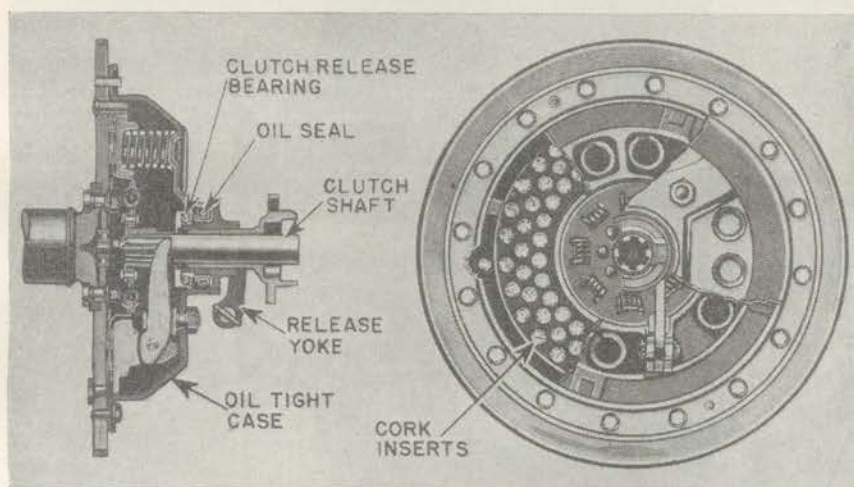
Lubricated (wet) plate clutch with cork inserts in the driven plate.
